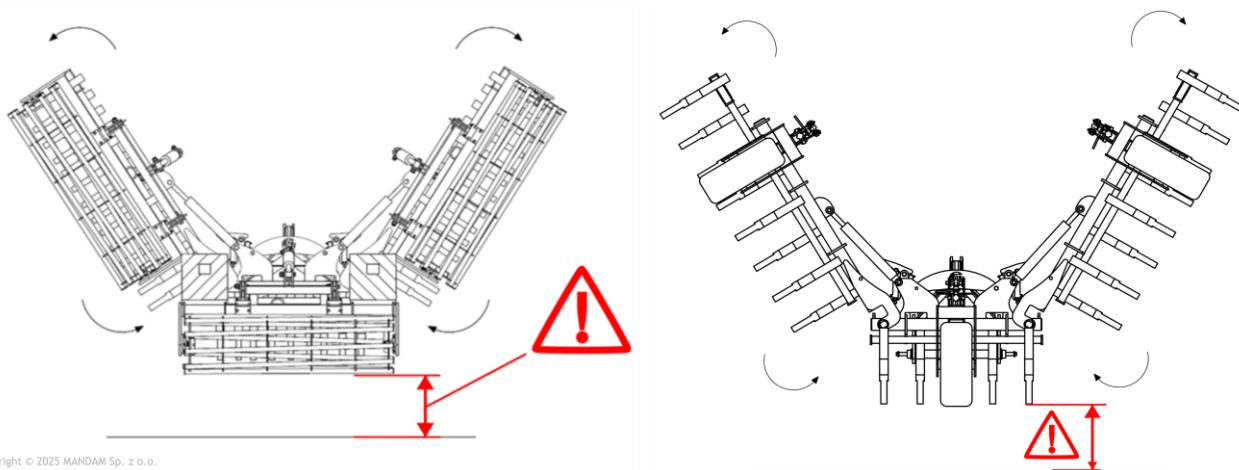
Machine opening sequence (3 - release of the hook of the hydraulic wing lock mechanism, 4 - opening of the machine wings)
